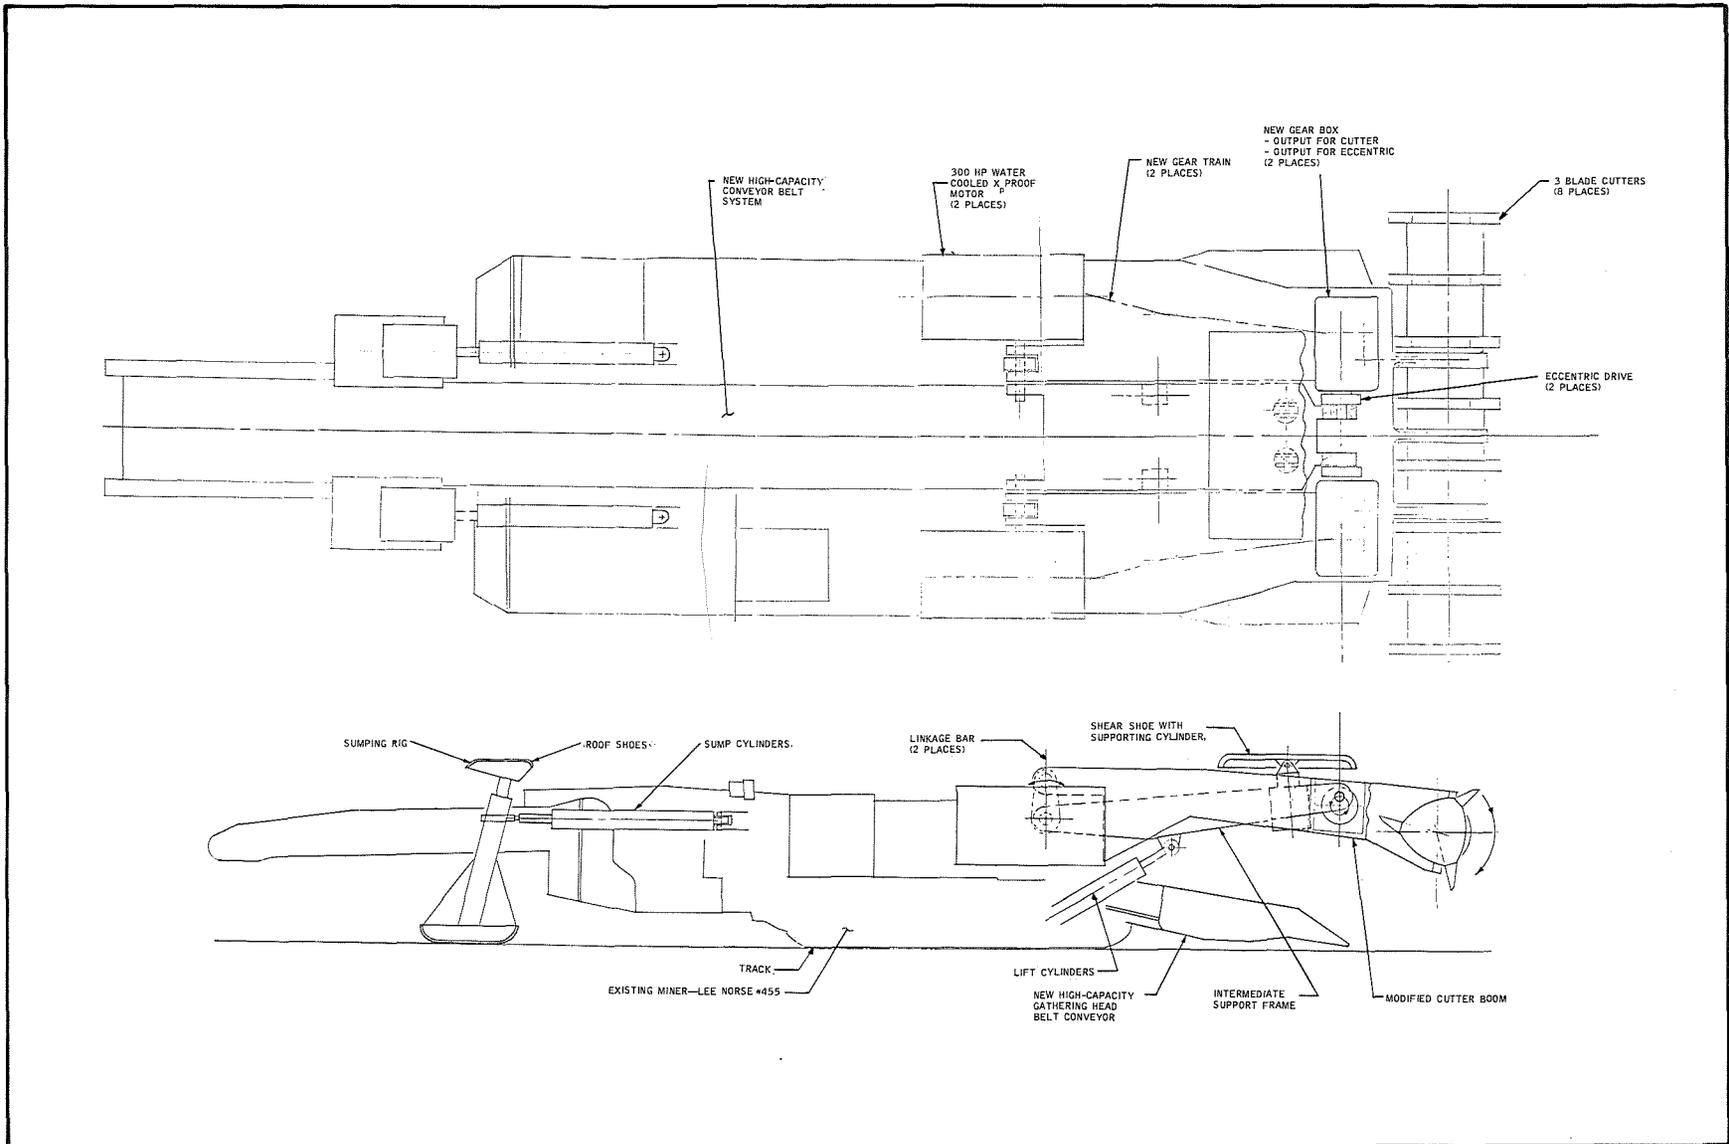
LAYOUT DRAWING, LINEAR CUTTING ROTARY HEAD CONCEPT
